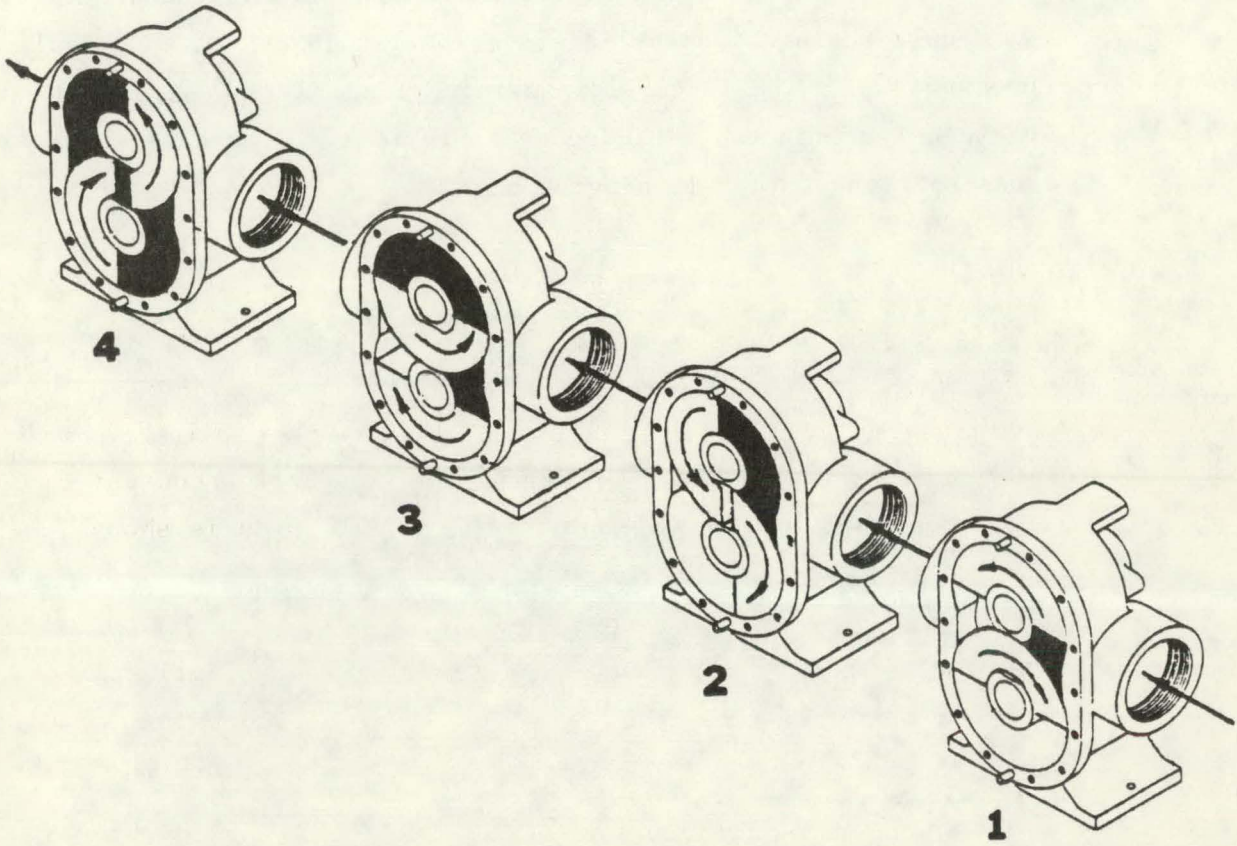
TUTHILL PUMP SHOWING PROGRESS OF MATERIAL THROUGH PUMP
